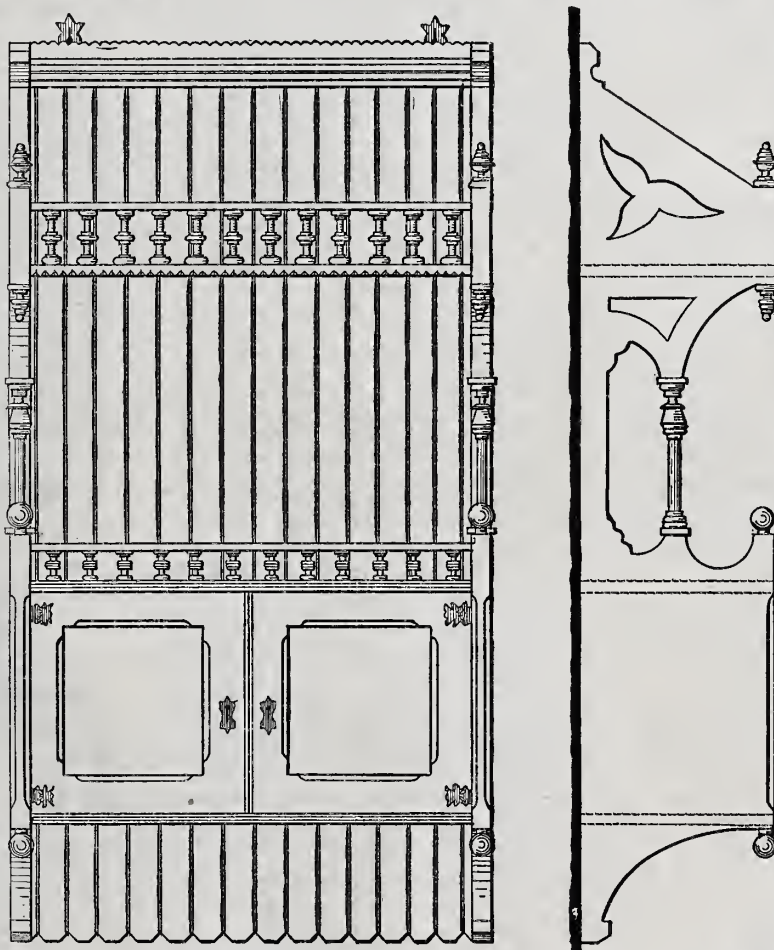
Elevation and Section of Wall Cabinet.—Scale, 1½ Inches Equal 1 Foot.—Details on Opposite Page are Half Full Size.
